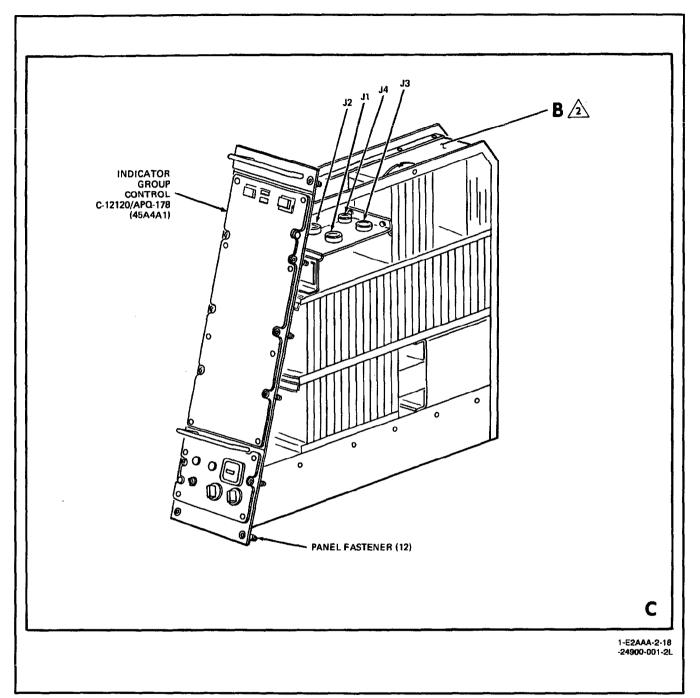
Removal and Installation of Indicator Group Control C-8589/APA-172 and C-12120/APQ-178 (Sheet 2)
